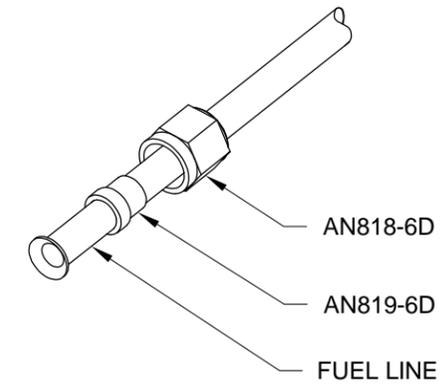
ASSEMBLE FUEL SUPPLY LINE
